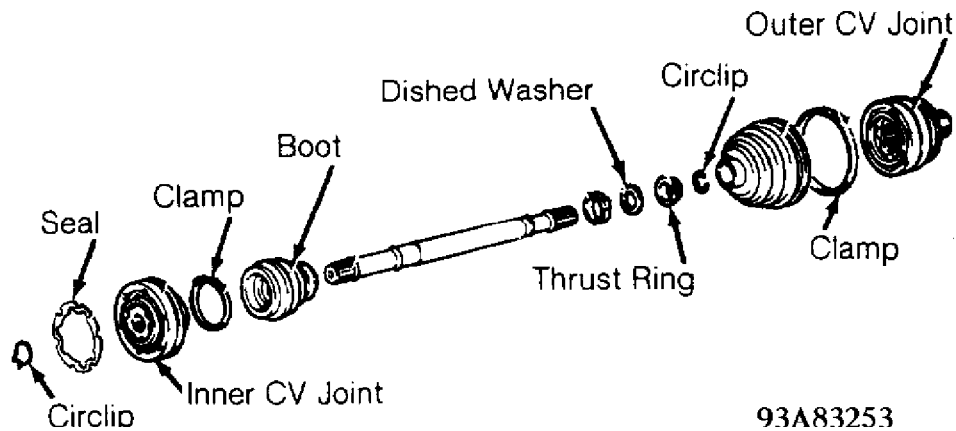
View Of Axle Shaft (M/T Transaxle Shown; Others Similar)
